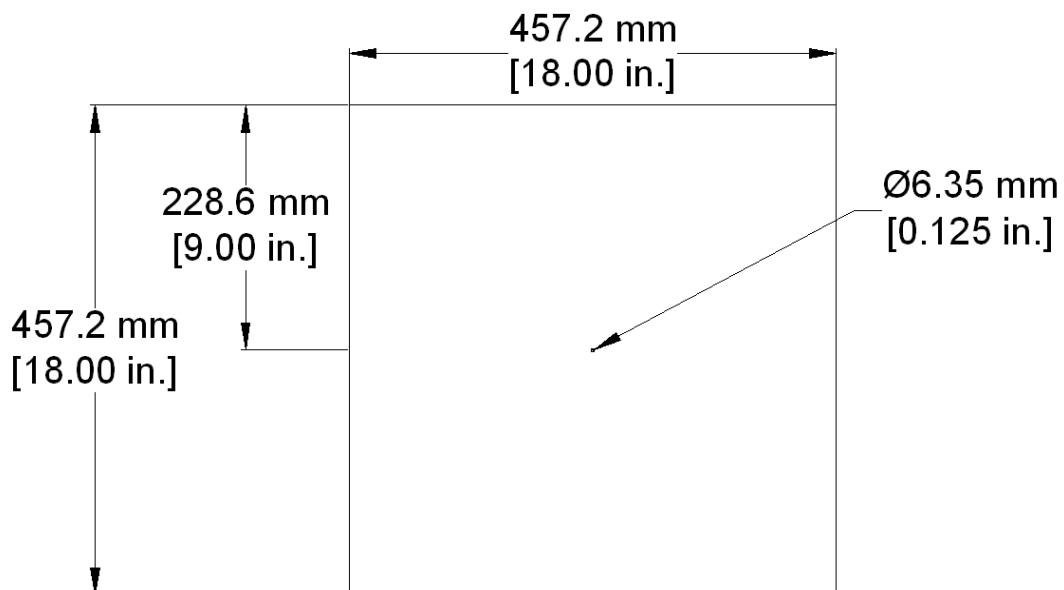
Geometric details of holes and edge distance dimensions for plate thickness FEMs
